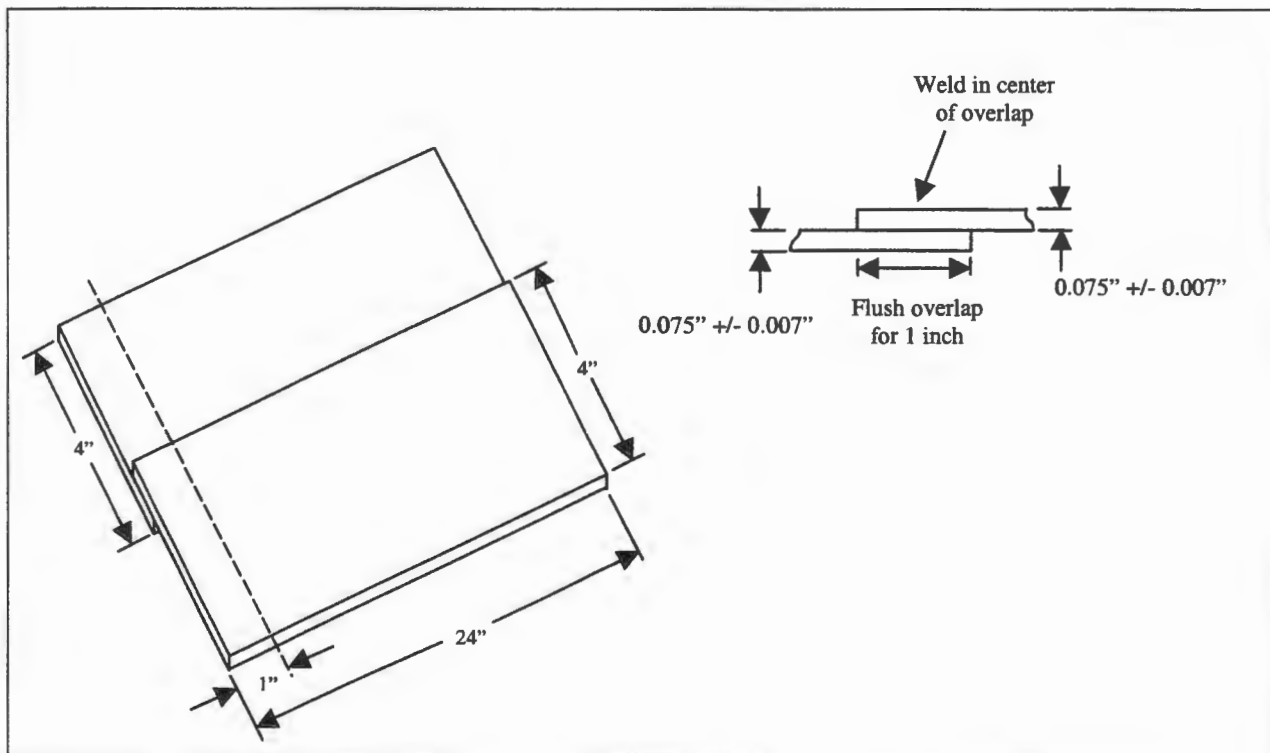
Schematic illustrating dimensions of spot weld assembly.
